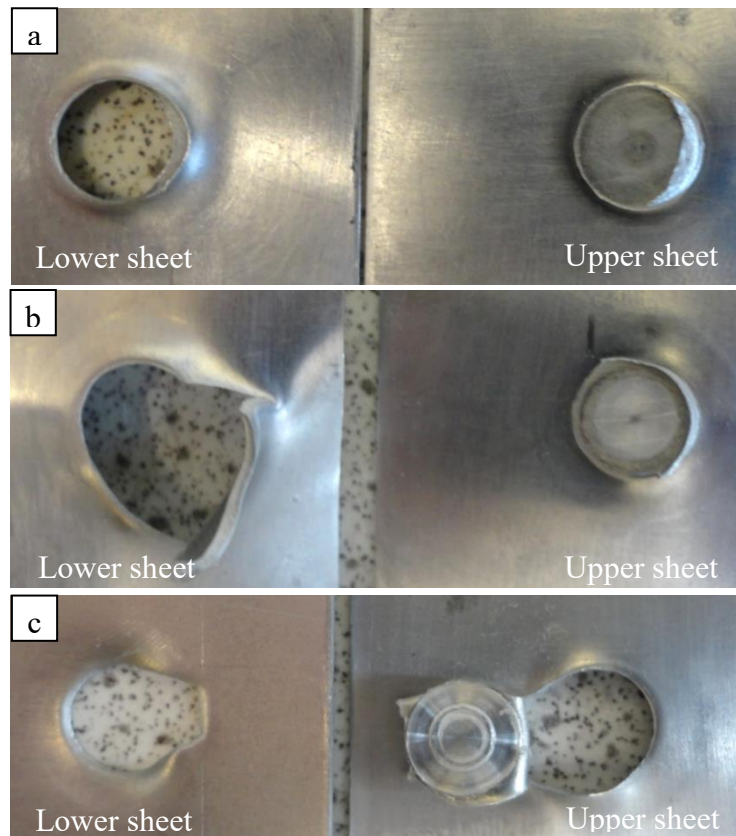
Examples of the failure behaviour showing both halves of the fractured lap-shear test samples welded with different welding parameters and tested in the as-welded condition: (a) 0.55 s at 1500 rpm, (b) 2.0 s at 1500 rpm, and (c) 1.5 s at 2000 rpm.
